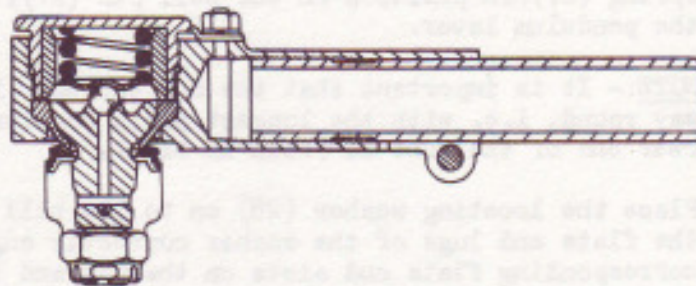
SECTION THROUGH BALL JOINT AT FRONT END OF SIDE STEERING TUBE.
